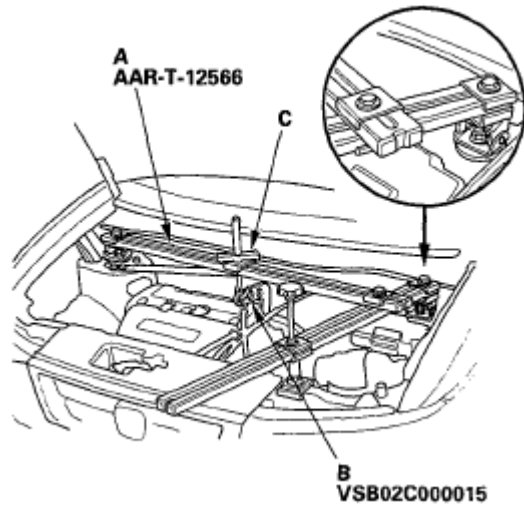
Identifying Engine Support Hanger And Engine Hanger/Adapter
